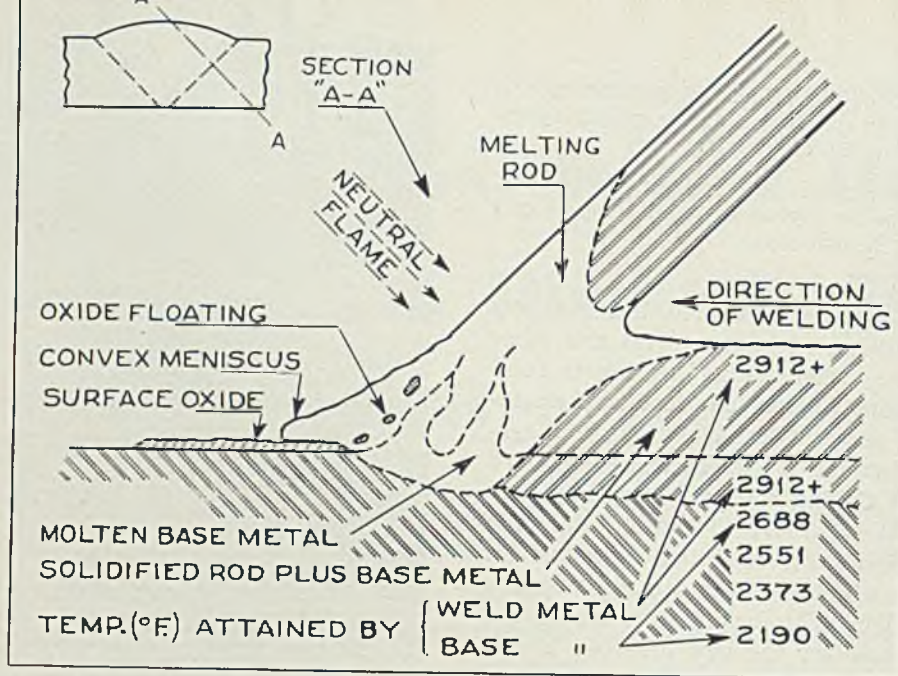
Metallurgical factors in neutral flame welding technique
